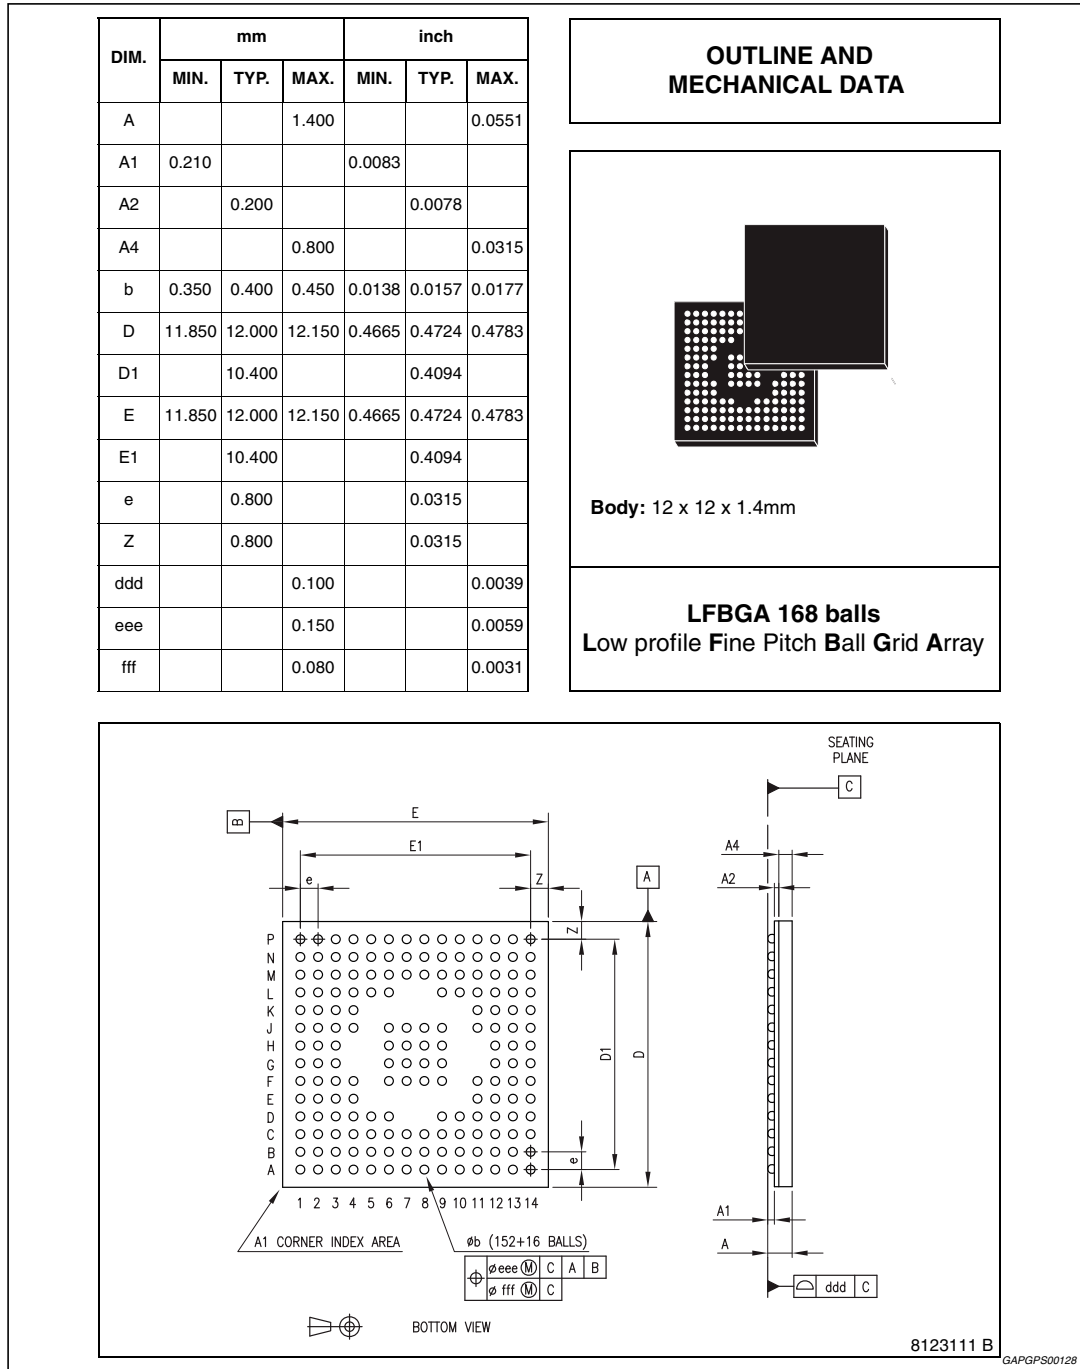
LFBGA 168 balls (12x12x1.4 mm) mechanical data and package dimensions
